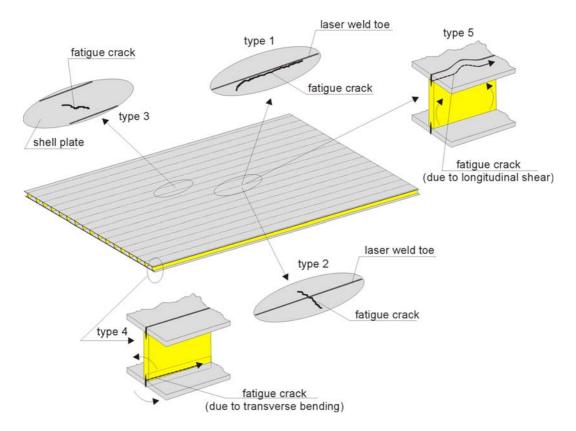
steel sandwich panels: types of fatigue damage.
